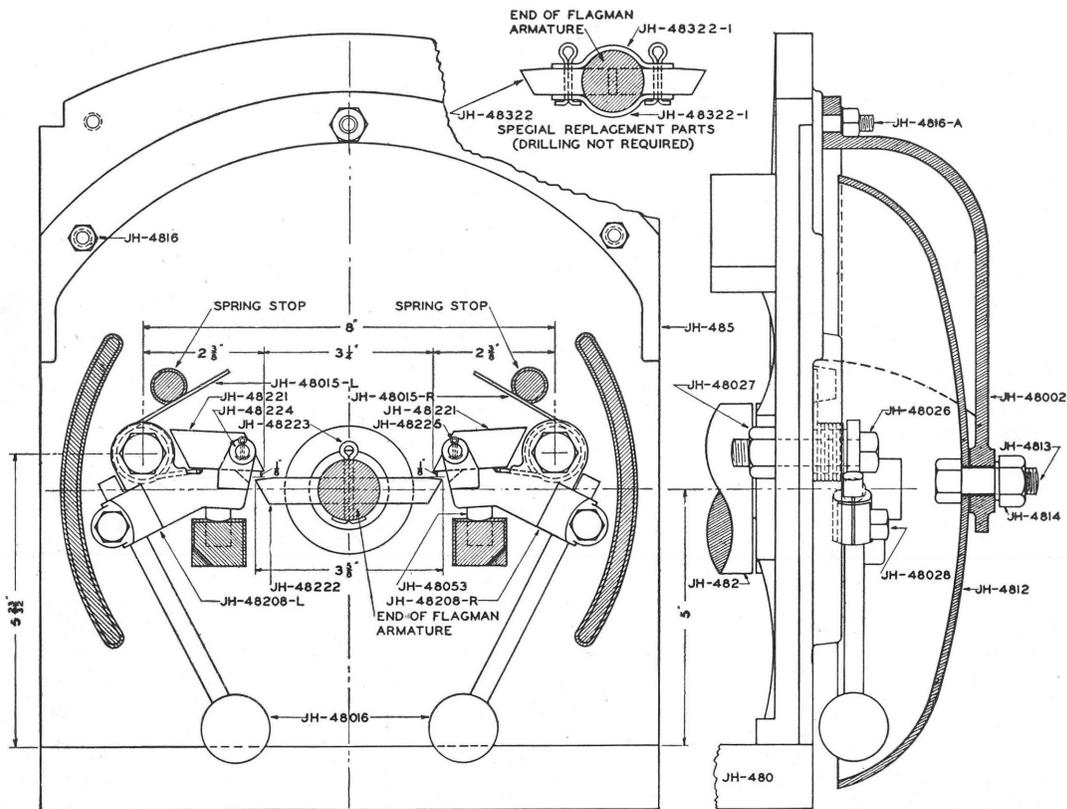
Magnetic Wigwag Flagman Mechanism — Detail Parts
